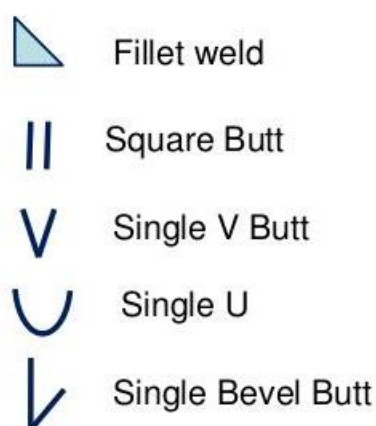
Symbols used for butt and fillet welds [36]
